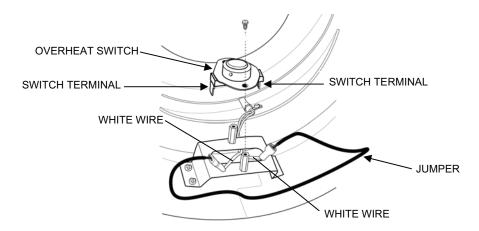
Diesel Heater Overheat Switch Test Set-Up.
